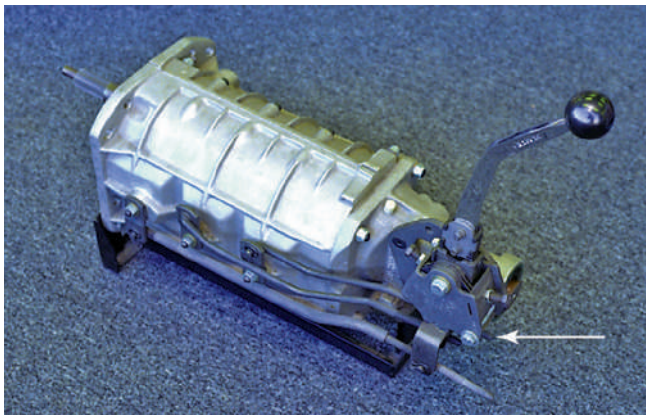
An external shifter assembly mounted to the transmission.
